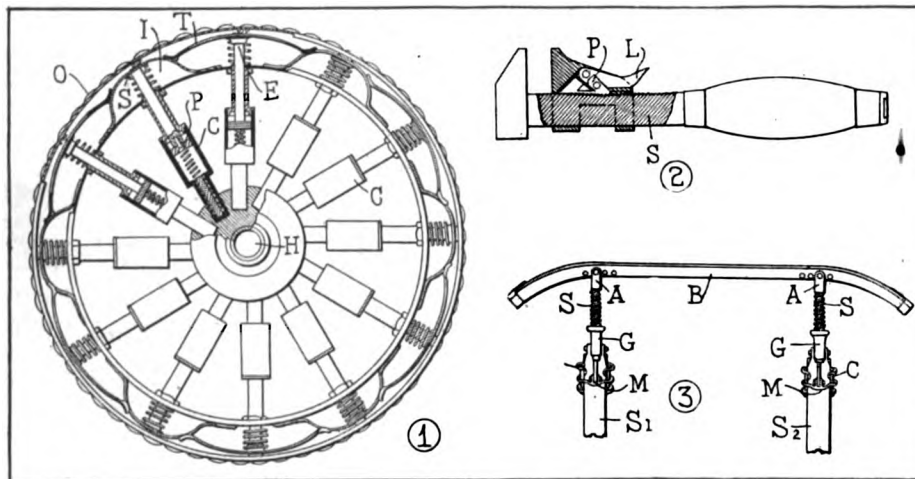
Calta wheel. Fig. 2—Anderson monkey wrench. Fig. 3—McGregor bumper
